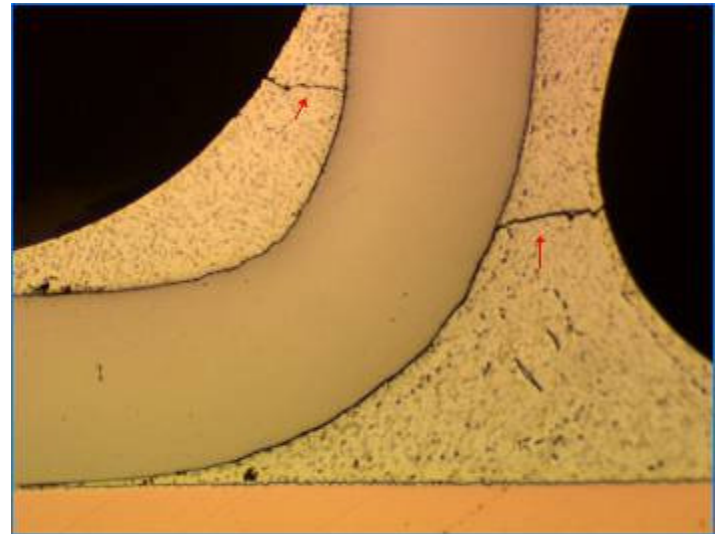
cross section, SN68, U16, left lead solder partial crack, 200xb
